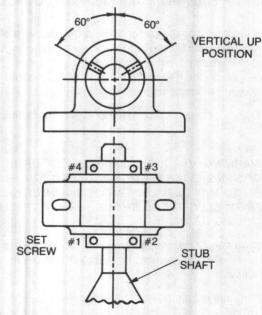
Instruction Sketch for Pillow Block Bearing with Double Lock Setscrew
